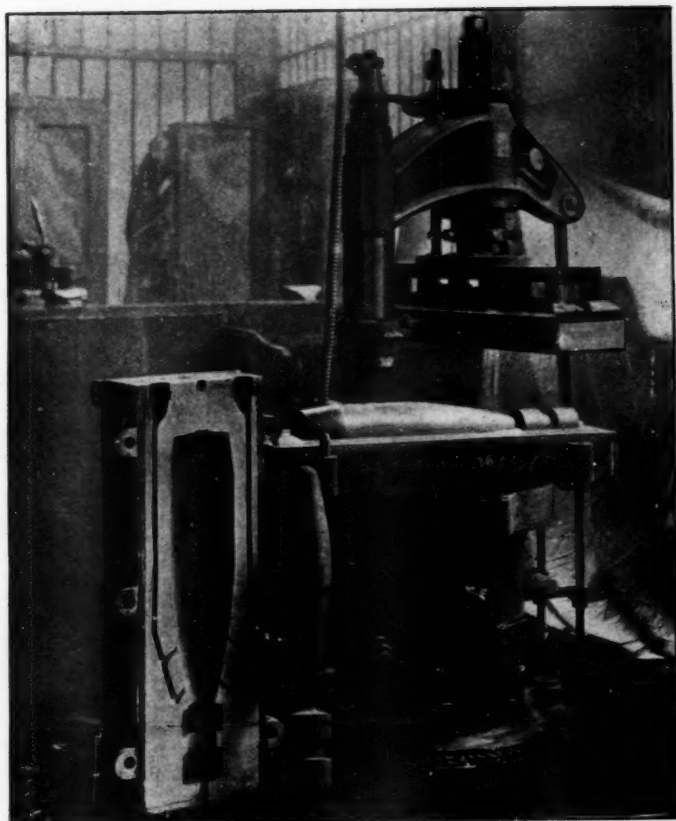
ENGLISH PROJECTILE MOLDING MACHINE
